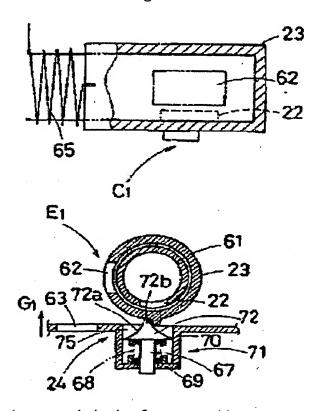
is an enlarged vertical cross-sectional view showing a closed state of a shutter of a development apparatus of a copy machine, according to one embodiment of the invention; Fig. 2 is an elevational view corresponding to Fig. 1; Fig. 3 is an enlarged vertical cross-sectional view showing an open state of the shutter; Fig. 4 is an elevational view corresponding to Fig. 3; Fig. 5 is a vertical cross-sectional view showing an attached state of a fist development unit; Fig. 6 is an elevational view showing an attached state of a second development unit; Fig. 7 is an enlarged vertical cross-sectional view of a replenishing tank; Fig. 8 is a transverse cross-sectional view of the replenishing tank; and Fig. 9 is a perspective view of the development apparatus of the copy machine. 1
